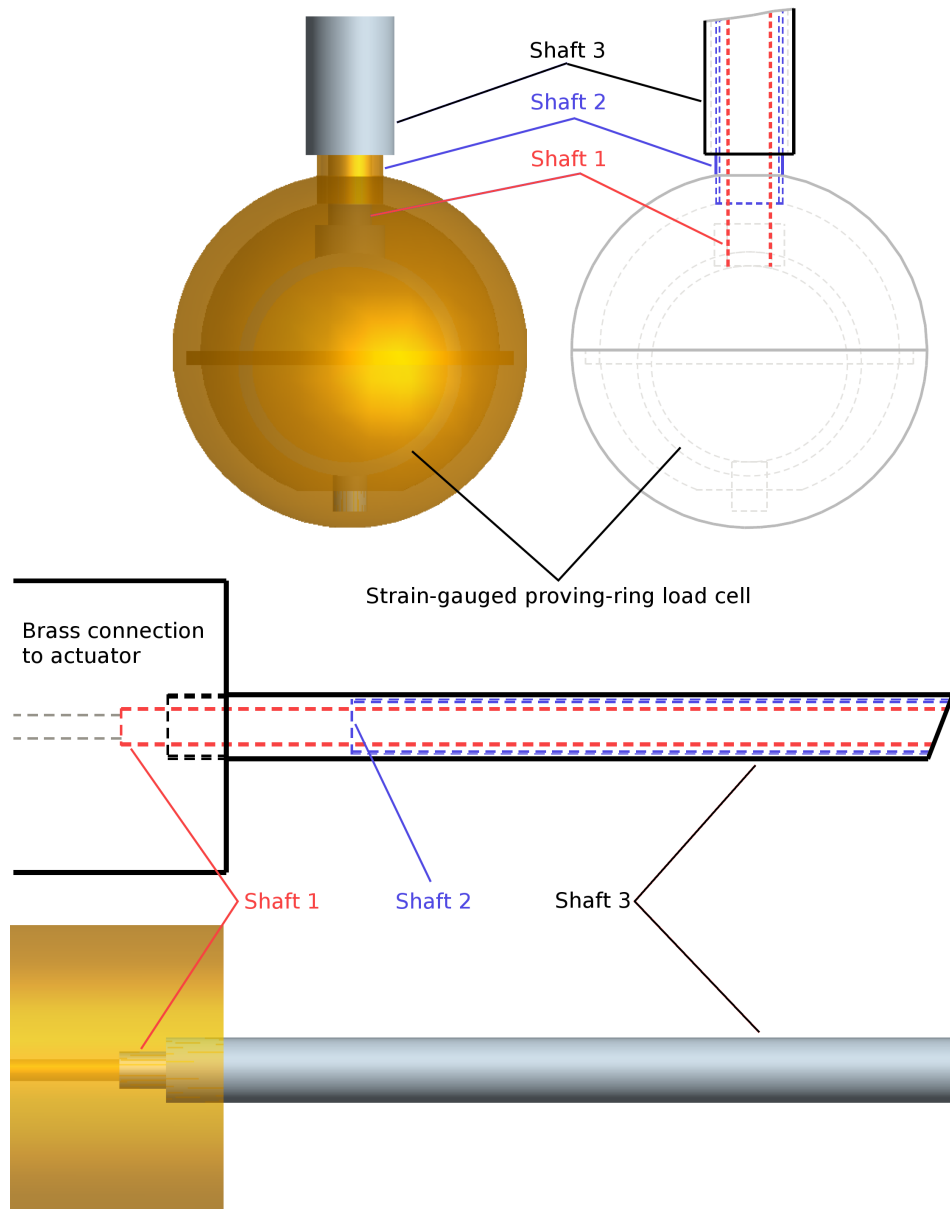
Drawings of mini ball penetrometer design showing the internal proving-ring load cell and arrangement of the three-shaft design used to prevent measurement of sleeve friction.
